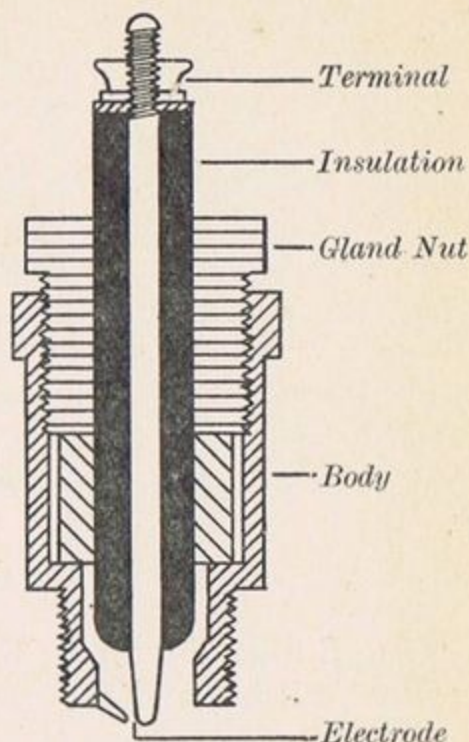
A.—SECTIONAL VIEW OF SPARKING PLUG
